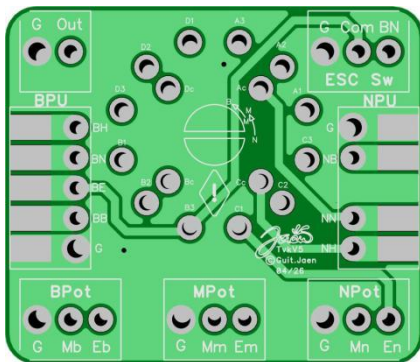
The PCB. The switch and cables will be installed later at the other side
